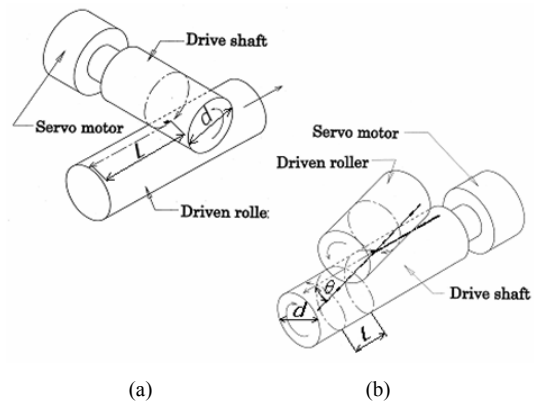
(a) Conventional friction drive. (b) Angular friction drive.
